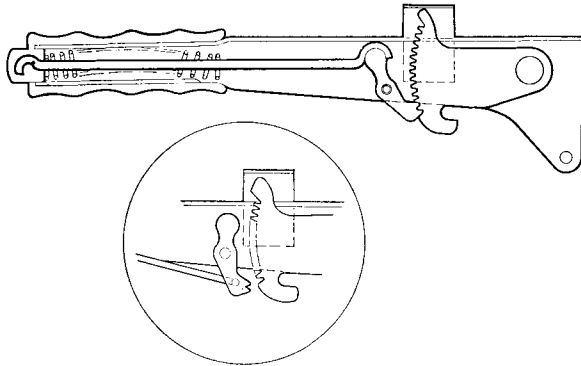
Arrangement of Herald 1200, 12/50 and Vitesse handbrake lever ratchet and pawl. Inset shows Spitfire arrangement
